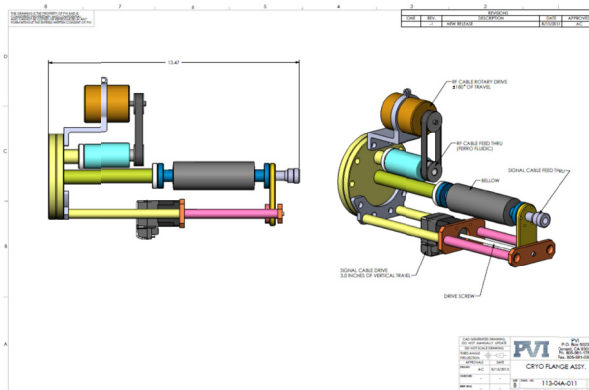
Flange mounted drives for adjustment of signal launch and pickup.
